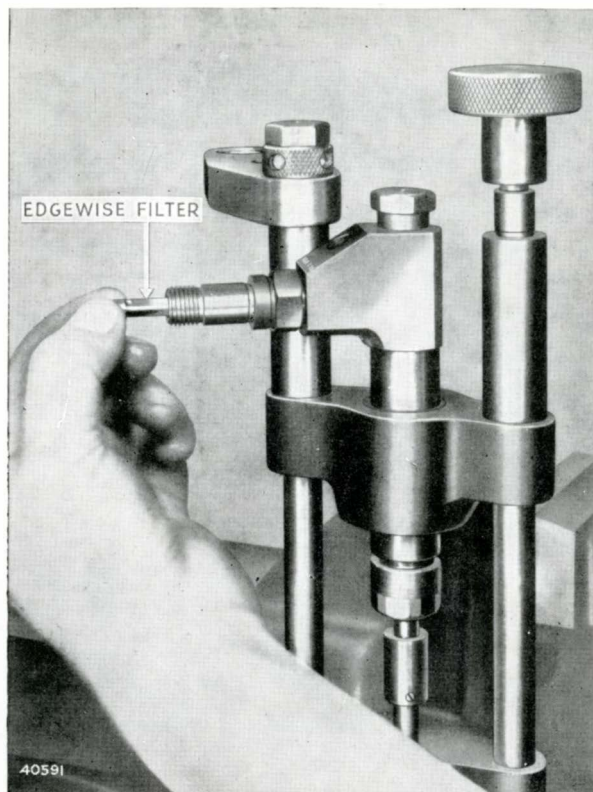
FITTING THE EDGEWISE FUEL FILTER
